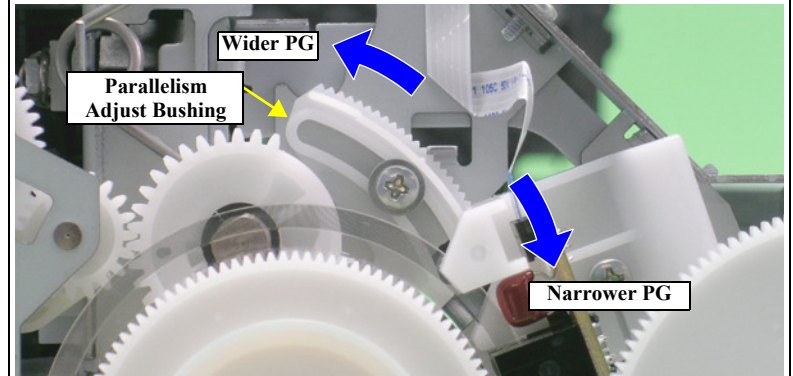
Relationship between Parallelism Adjust Bushing and PG
